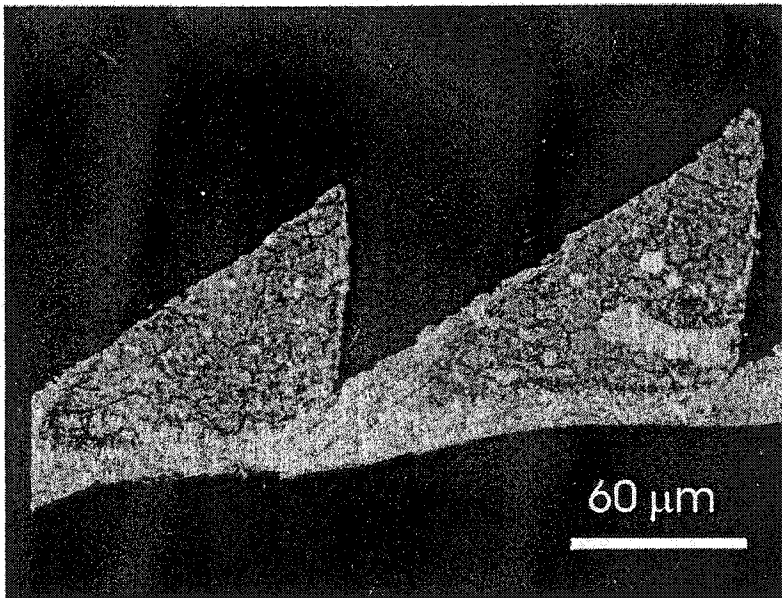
Morphology of chip produced at a feed level of 0.1016 mm/rev and a cutting speed of 110 m/min.
